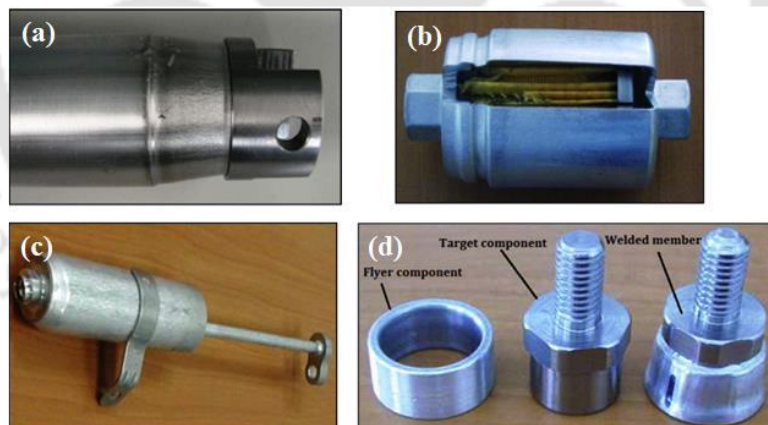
Components of automotive sector obtained with : (a) drive shaft (Al/steel joint), (b) fuel filter (Al/Al joint), (c) automotive A/C receiver-dryer, (d) automotive earth connector [32]
